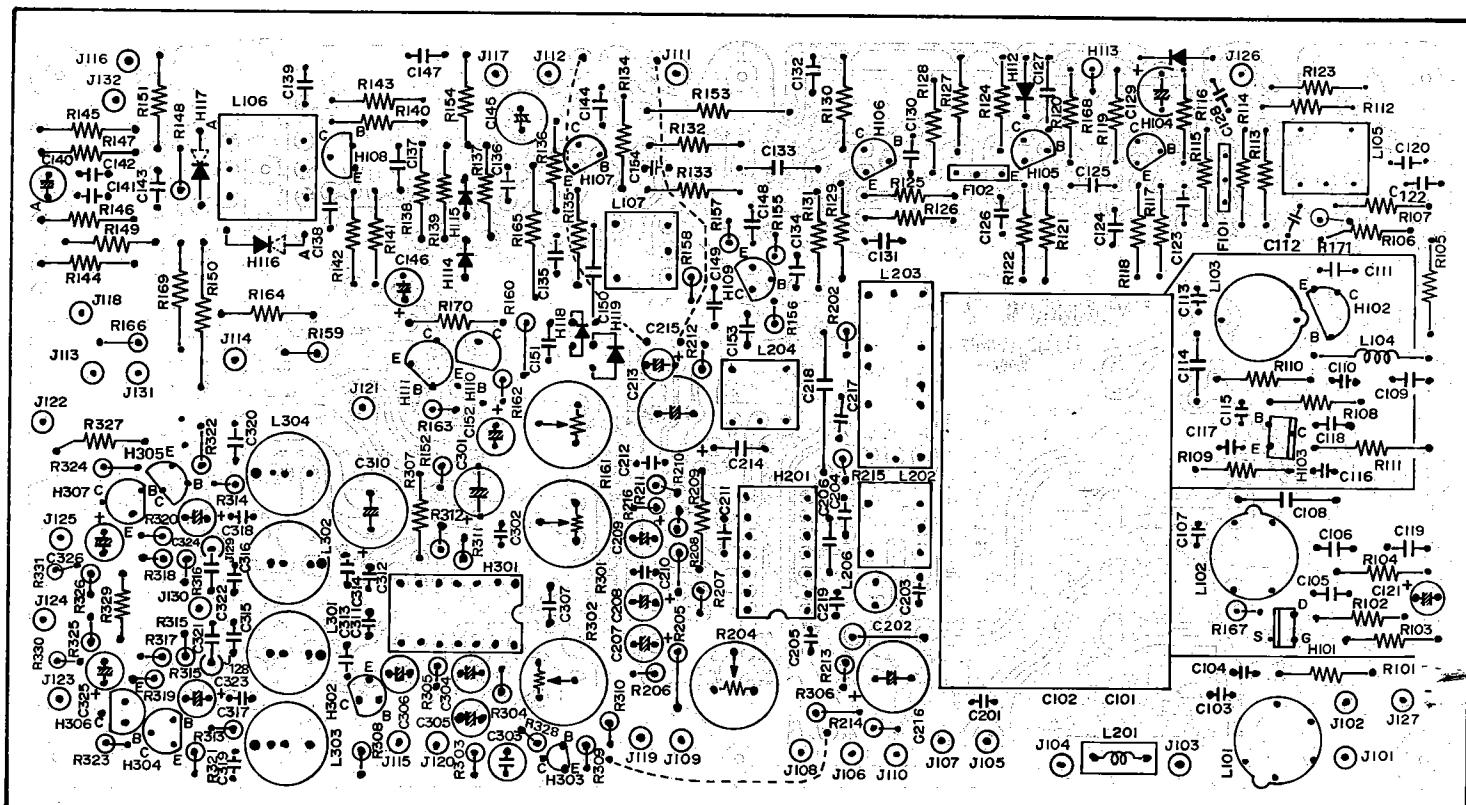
FM/AM Tuner Assembly (P100) Component Locations
